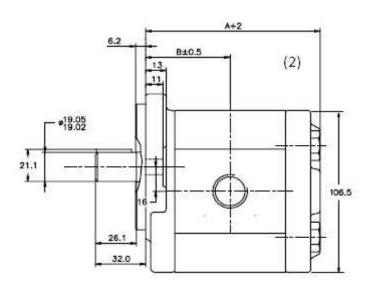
(1) and (2) Dimension of the Gear pump in millimeter, A=90mm,B=1 43mm.
